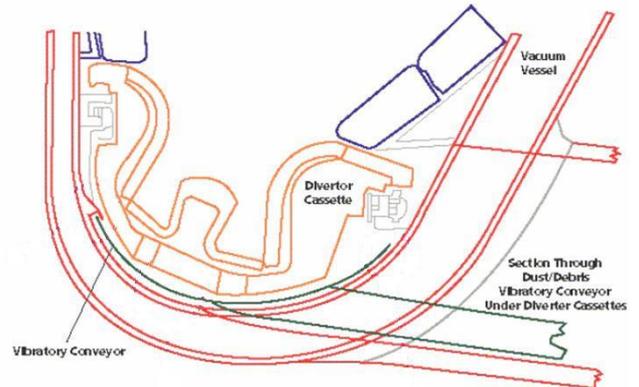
Poloidal cross section showing location of toroidal vibratory conveyor
